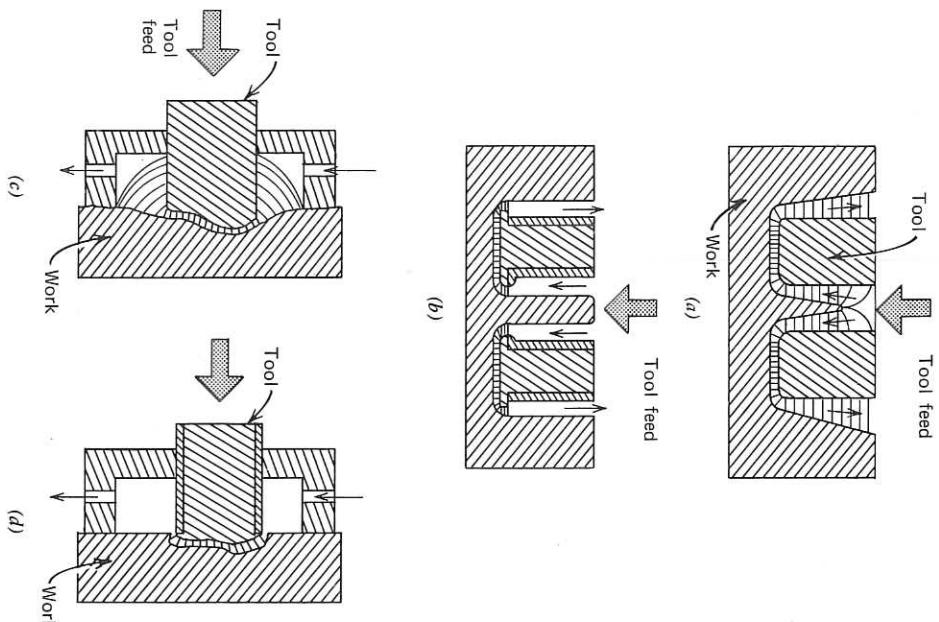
(a) Considerable side cutting occurs with an uninsulated generating tool. (b) Side cutting is substantially reduced if the sides of a generating tool are insulated. (c) An uninsulated die sinking tool heavily machines surfaces around the intended machining area. (d) An insulated die sinking tool limits stray machining of adjacent surfaces.
